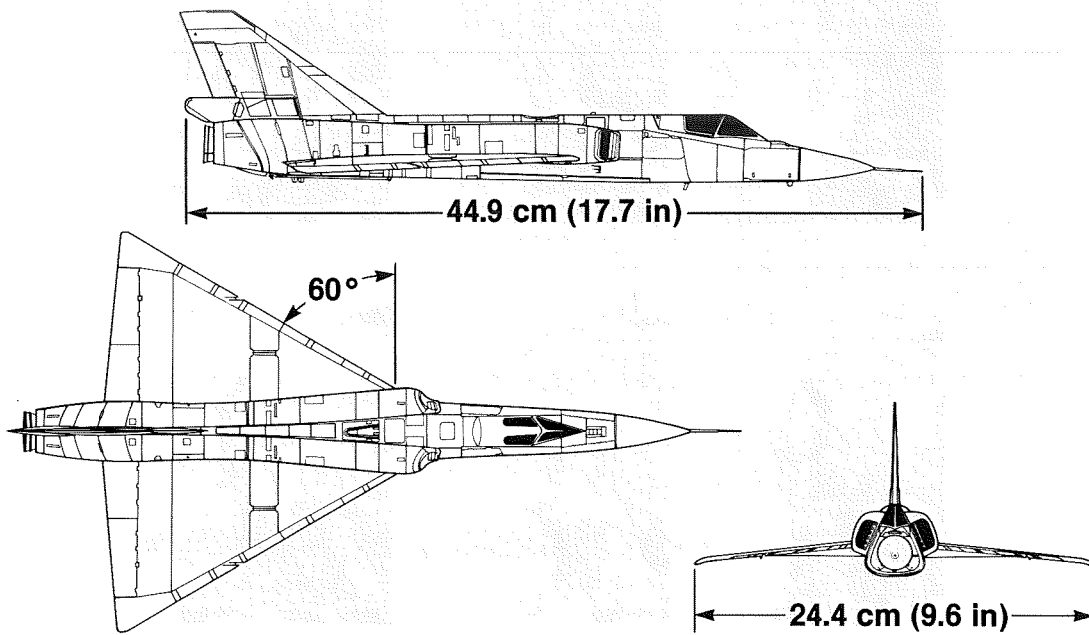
Three-view drawing of F-106A model with overall dimensions.
